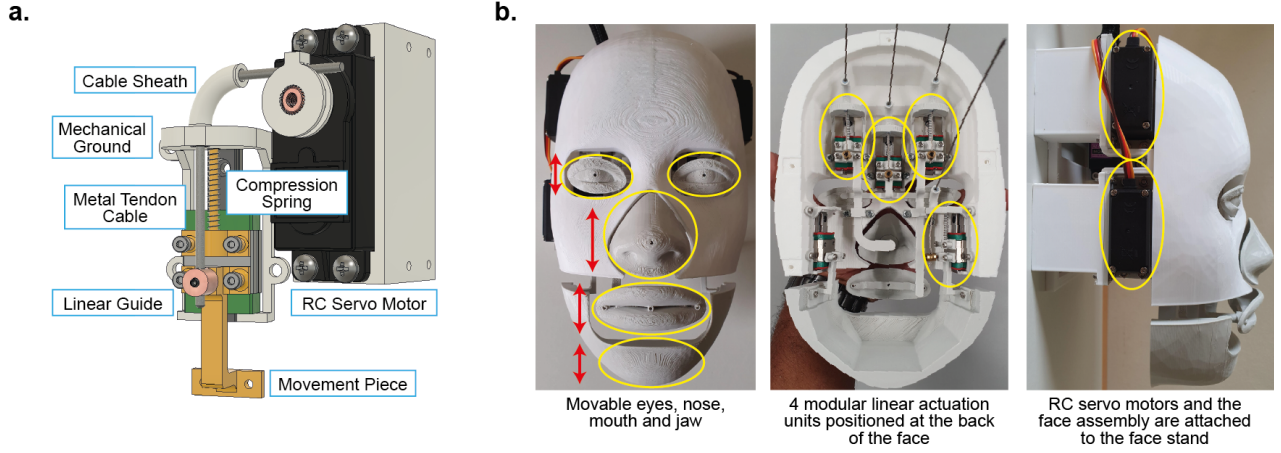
Design and implementation of the physical face. (a) Autodesk Fusion 360 3D model of a modular linear actuation unit. (a) 3D printed physical face with movable face parts (movements indicated by red arrows), Bowden cables and RC servo motors installed.
